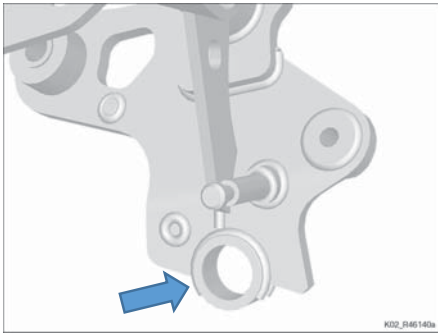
G 310 GS old bearing support for the side stand (arrow).
